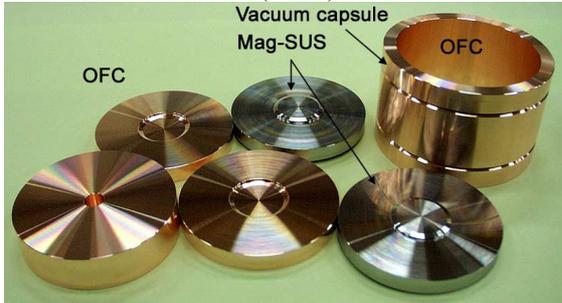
PPM components before assembly. They are stacked together and then inserted into the vacuum capsule.
